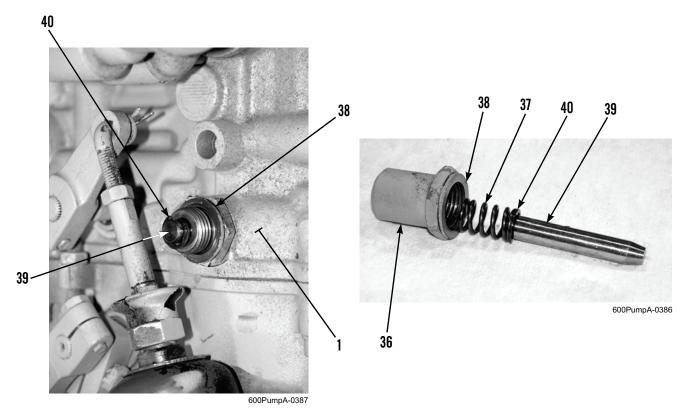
Setting Fuel Delivery to Cylinder No. 1.
